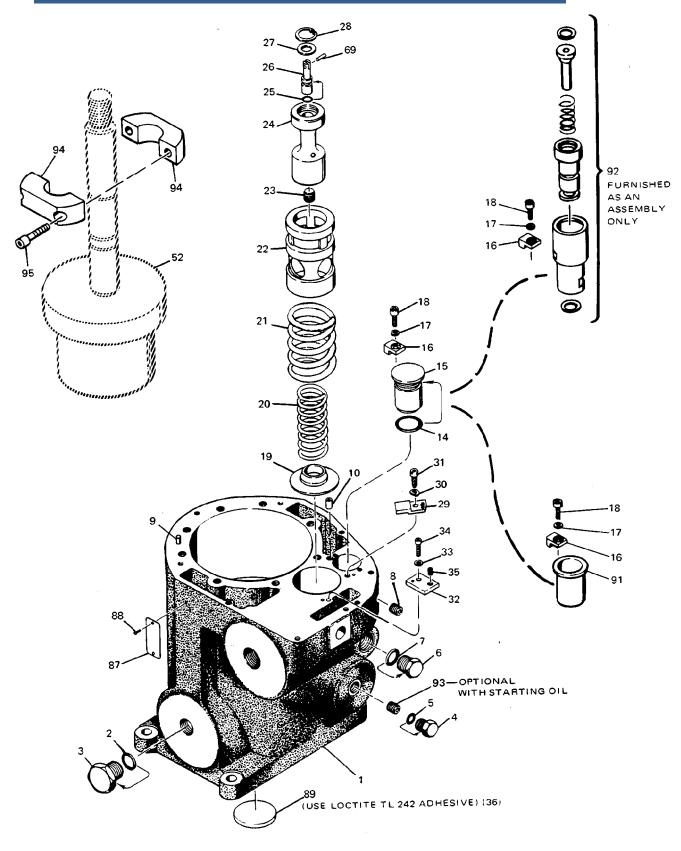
Exploded View, Mechanical Input-Hydraulic Amplifier
